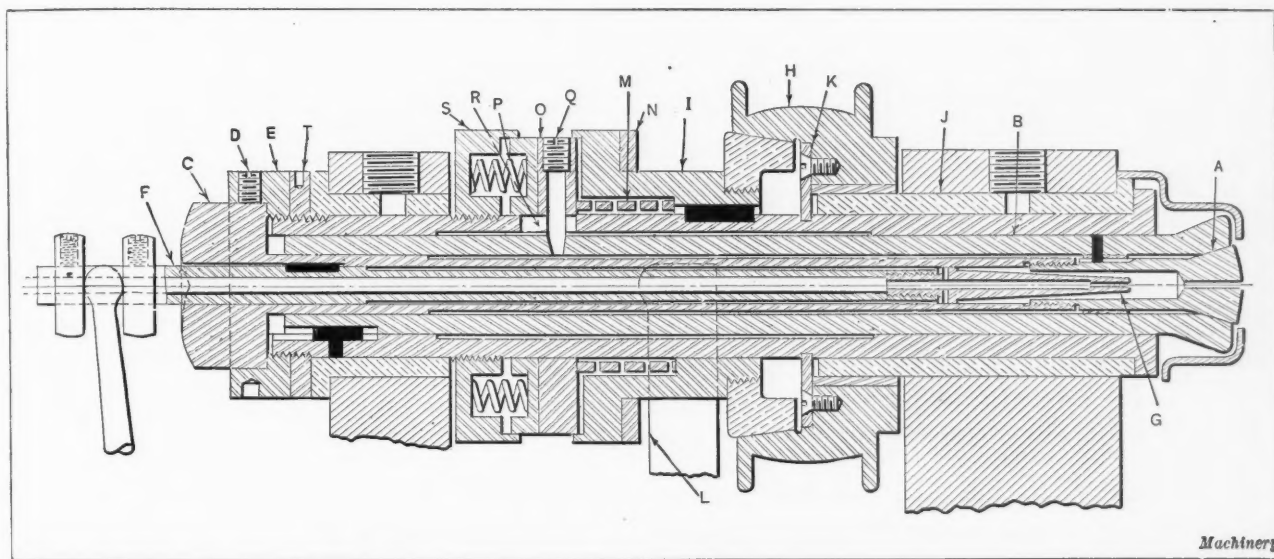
Sectional View of High-speed Spindle designed for Use on a Bench Screw Machine
